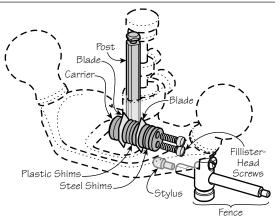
Components of the inlay cutter head. (Router plane not included.)
